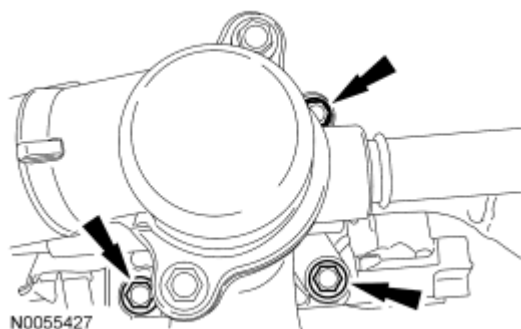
Locating Thermostat Housing-To-Lower Intake Manifold Bolts
